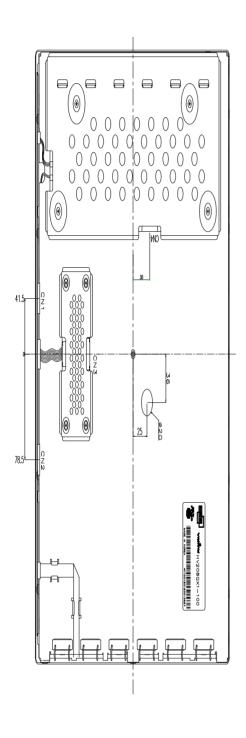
TFT-LCD Module Outline Dimensions (Back view)
